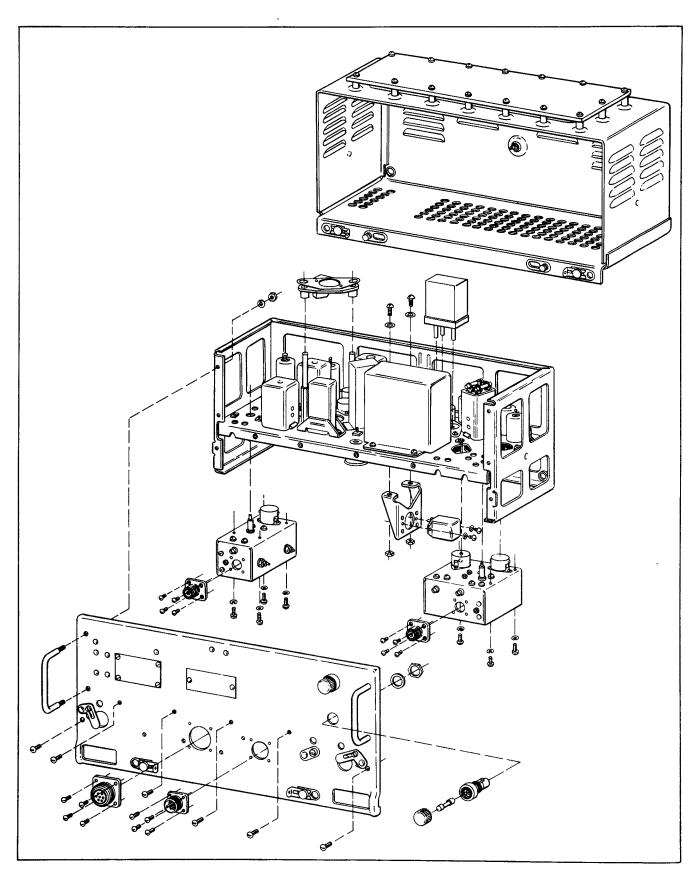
Radio Receiver and Transmitter BC-788-D, Exploded View
